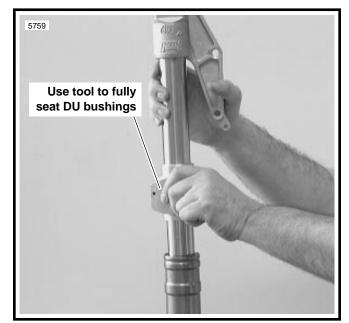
Installing Bushings and Seals Using Front Fork Bushing/Seal Installer (Part No. B-41176)
